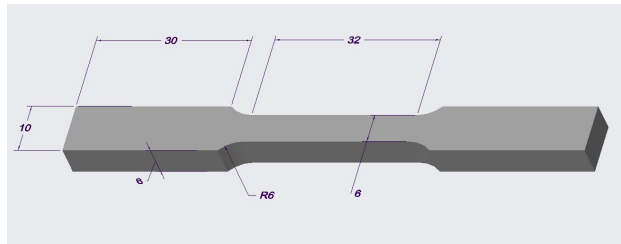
Tensile testing specimen as per ASTM E8 std.
